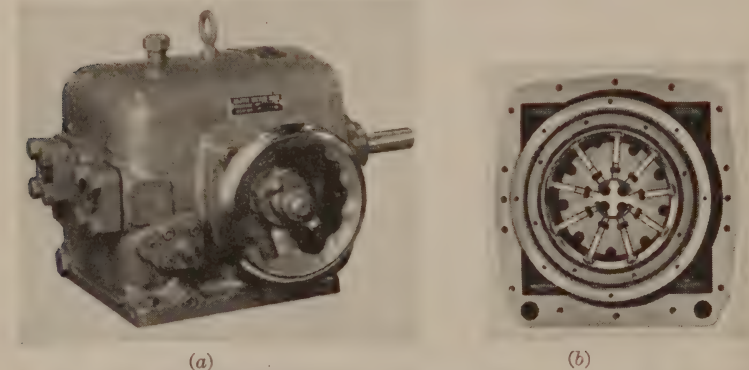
Variable-displacement pump; (b) section view of the plunger pump contained in this unit. The position of the slide block (2, Fig. 315) to give greater or less flow of oil is adjusted by turning the hand-wheel shown in (a). (*Courtesy of The Oilgear Company.*)
